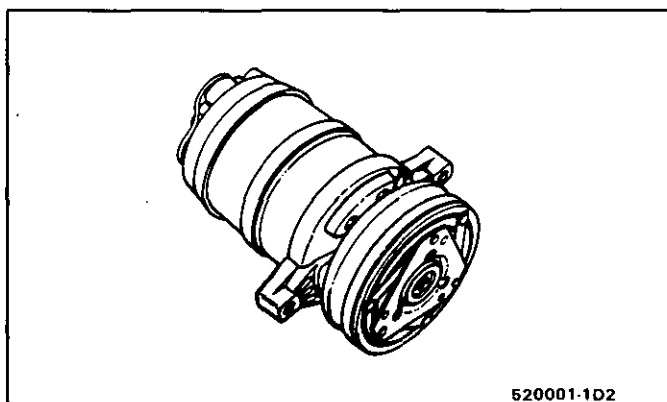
DA-6 Compressor, V-Groove Pulley & Standard Mounting
